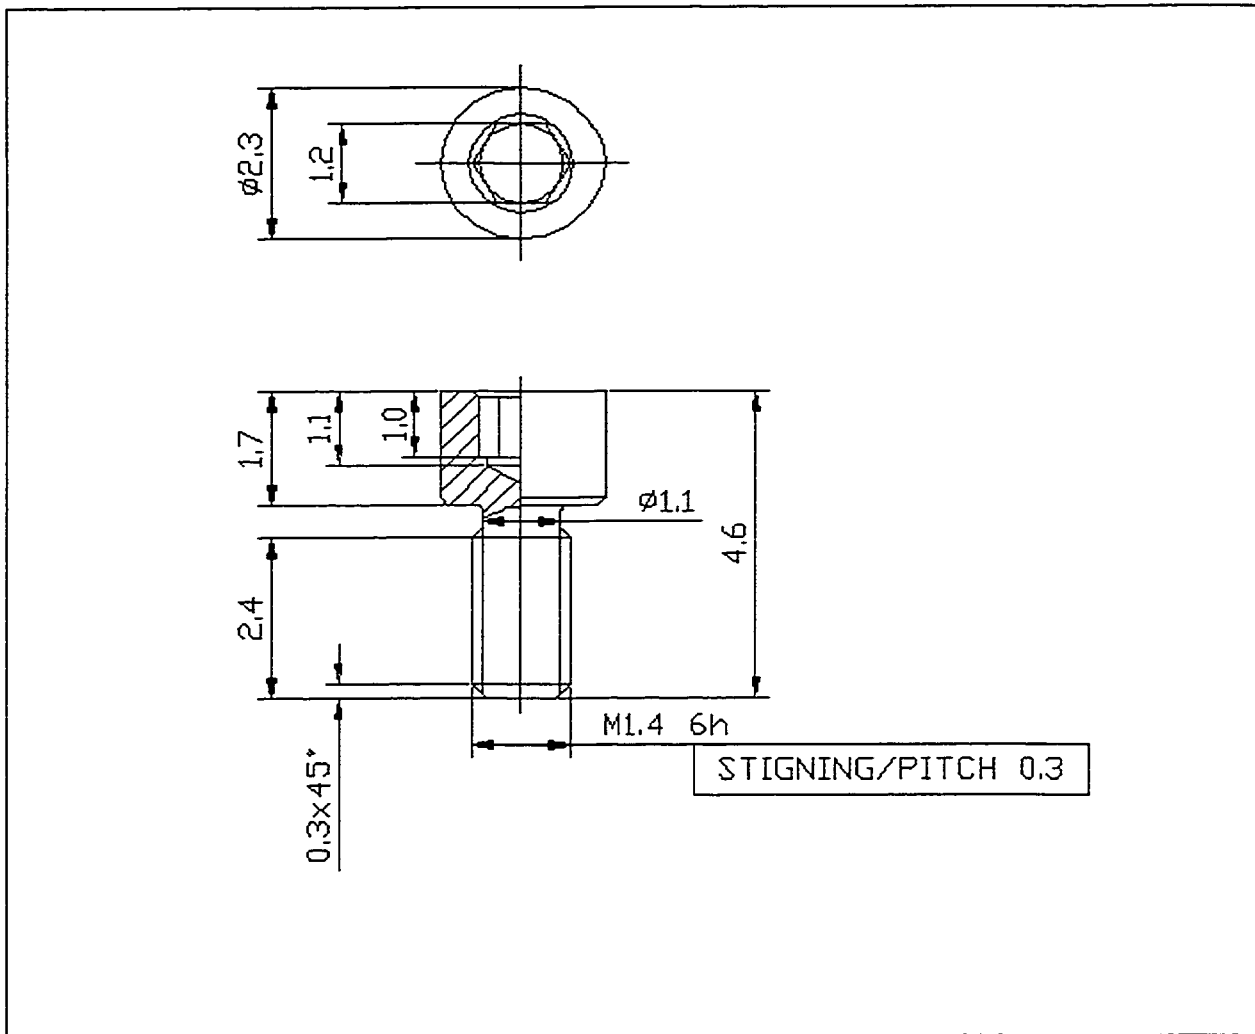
Nobel Biocare Hexagon Head Gold Screw (All dimensions in mm)
